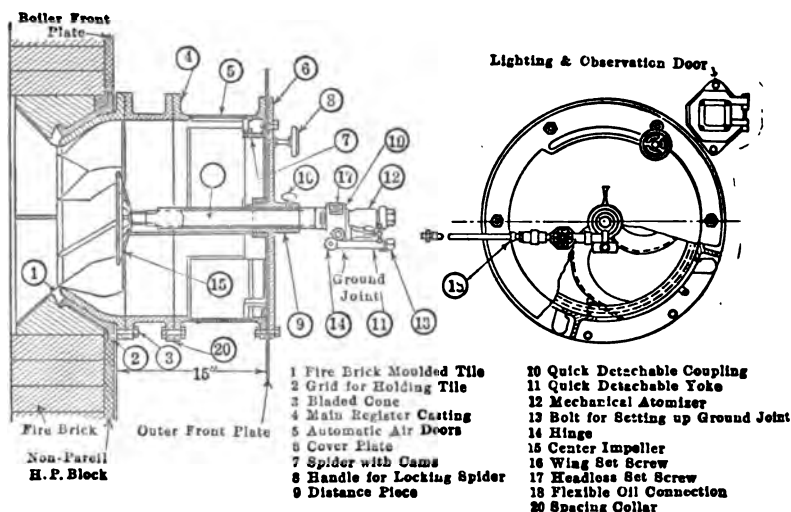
The Babcock and Wilcox mechanical oil burners showing double front construction for forced draft.
